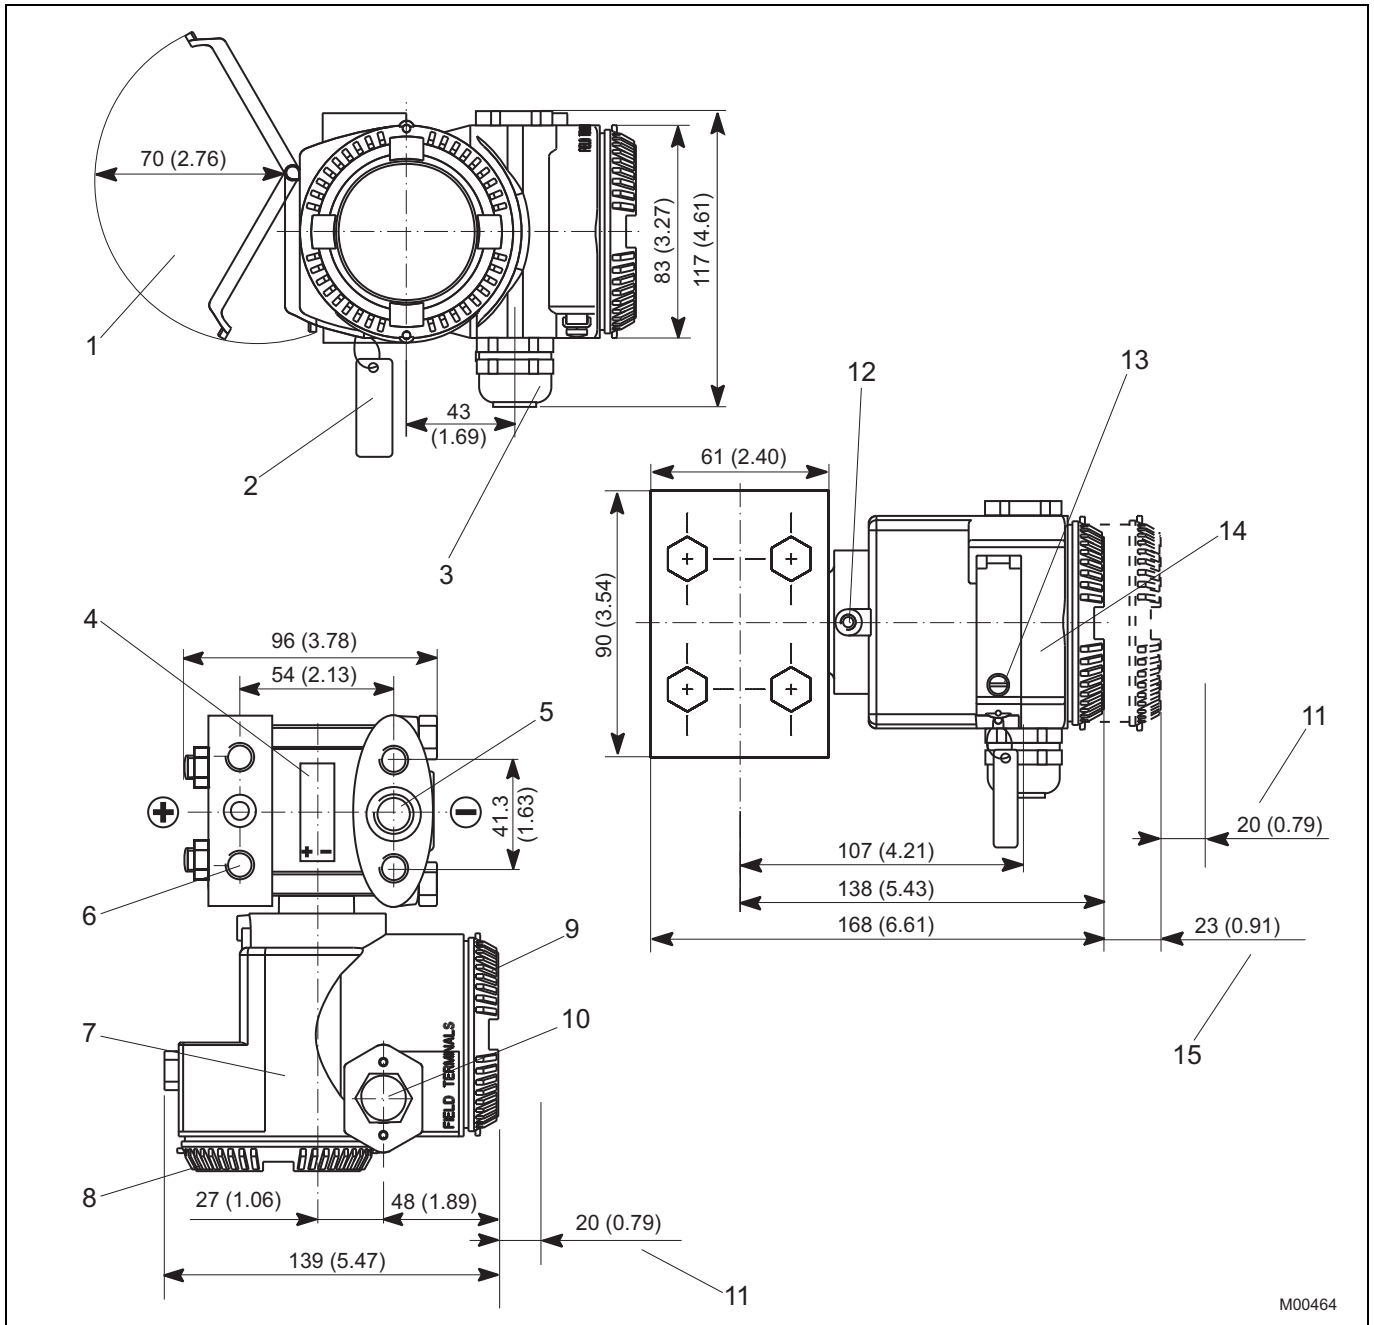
Dimensions in mm (inches), deviations in the drawing are possible
